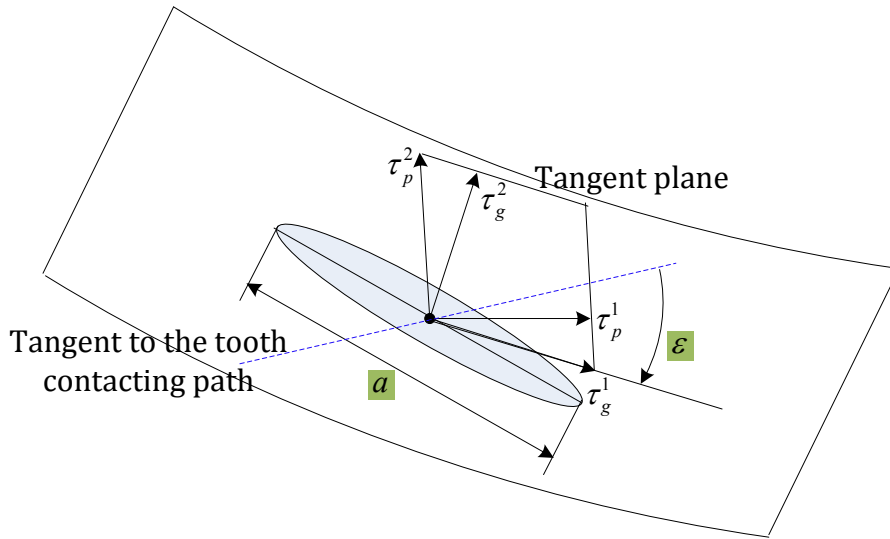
Local synthesis between gear and pinion tooth surfaces.
